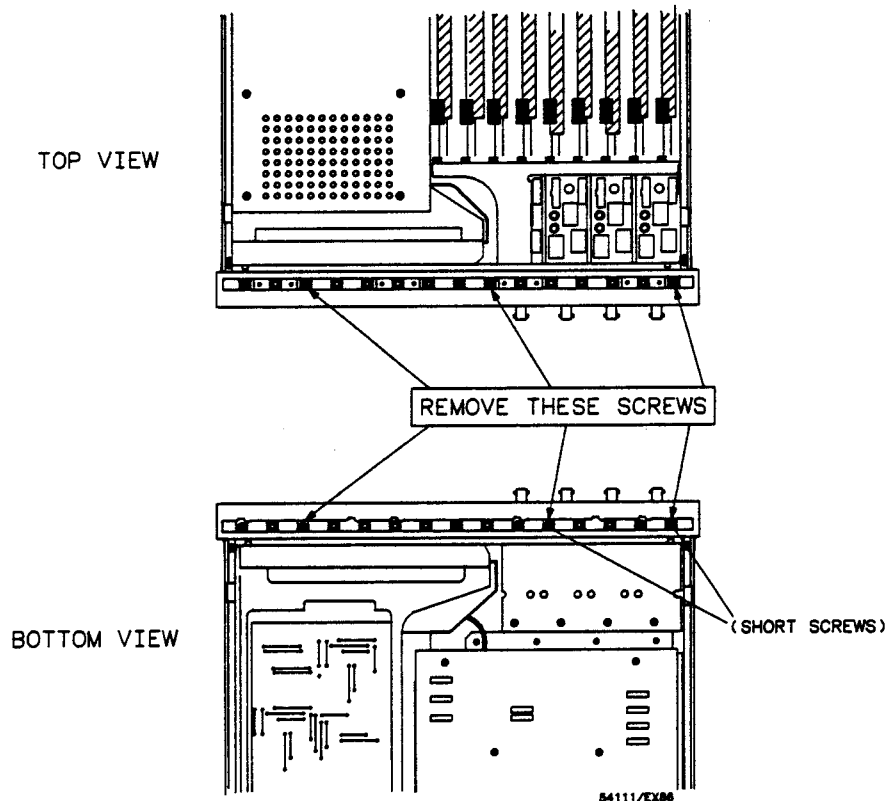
A-4. Top and Bottom Front Panel Mounting Screws.
